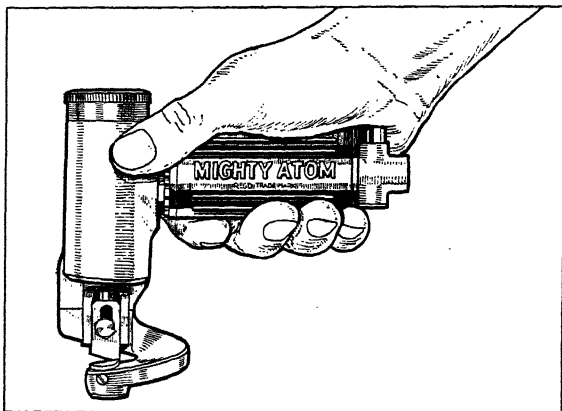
A PORTABLE "MIGHTY ATOM" SHEAR FOR TRIMMING SHEETS UP TO 18 S.W.G.
